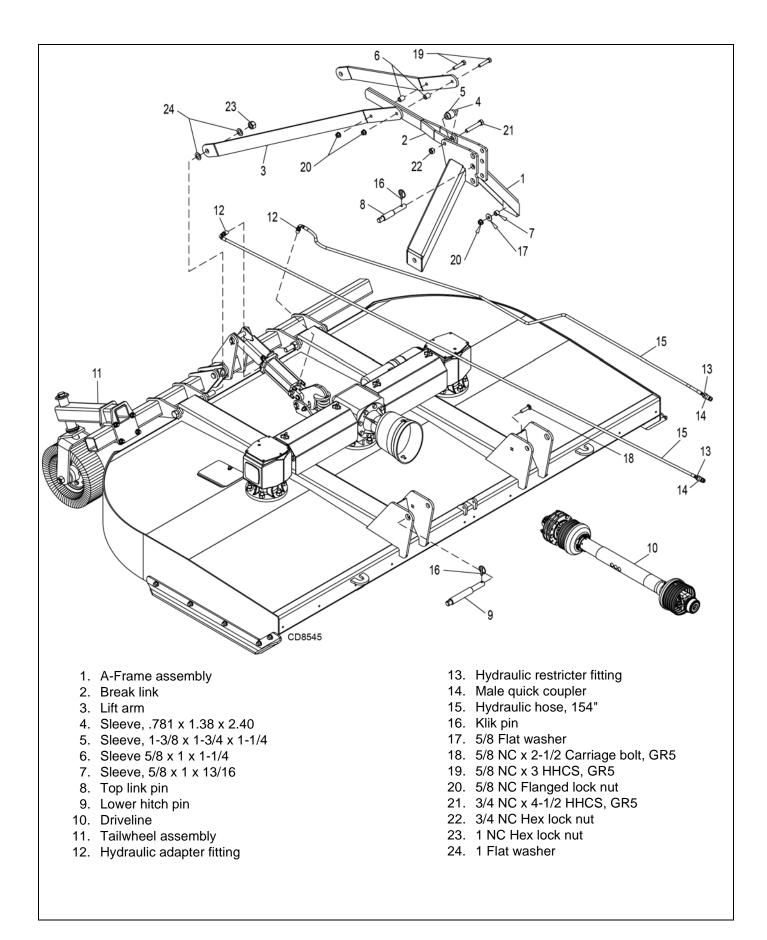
DS8.50 & DS10.50 3-Point Mounted Cutter Assembly
